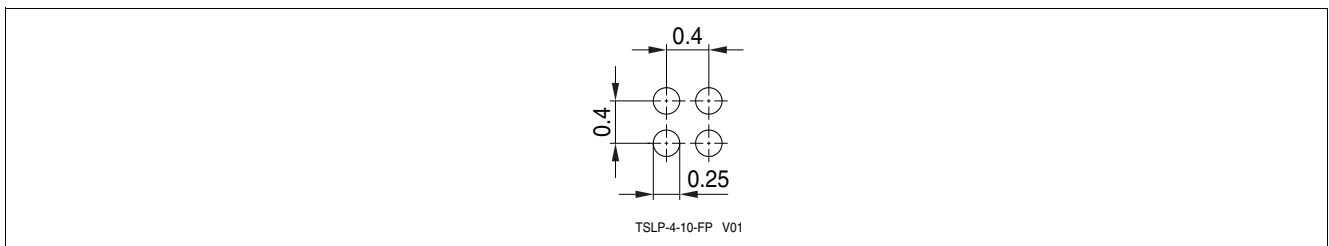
TSLP-4-10: Footprint (dimension in mm)
